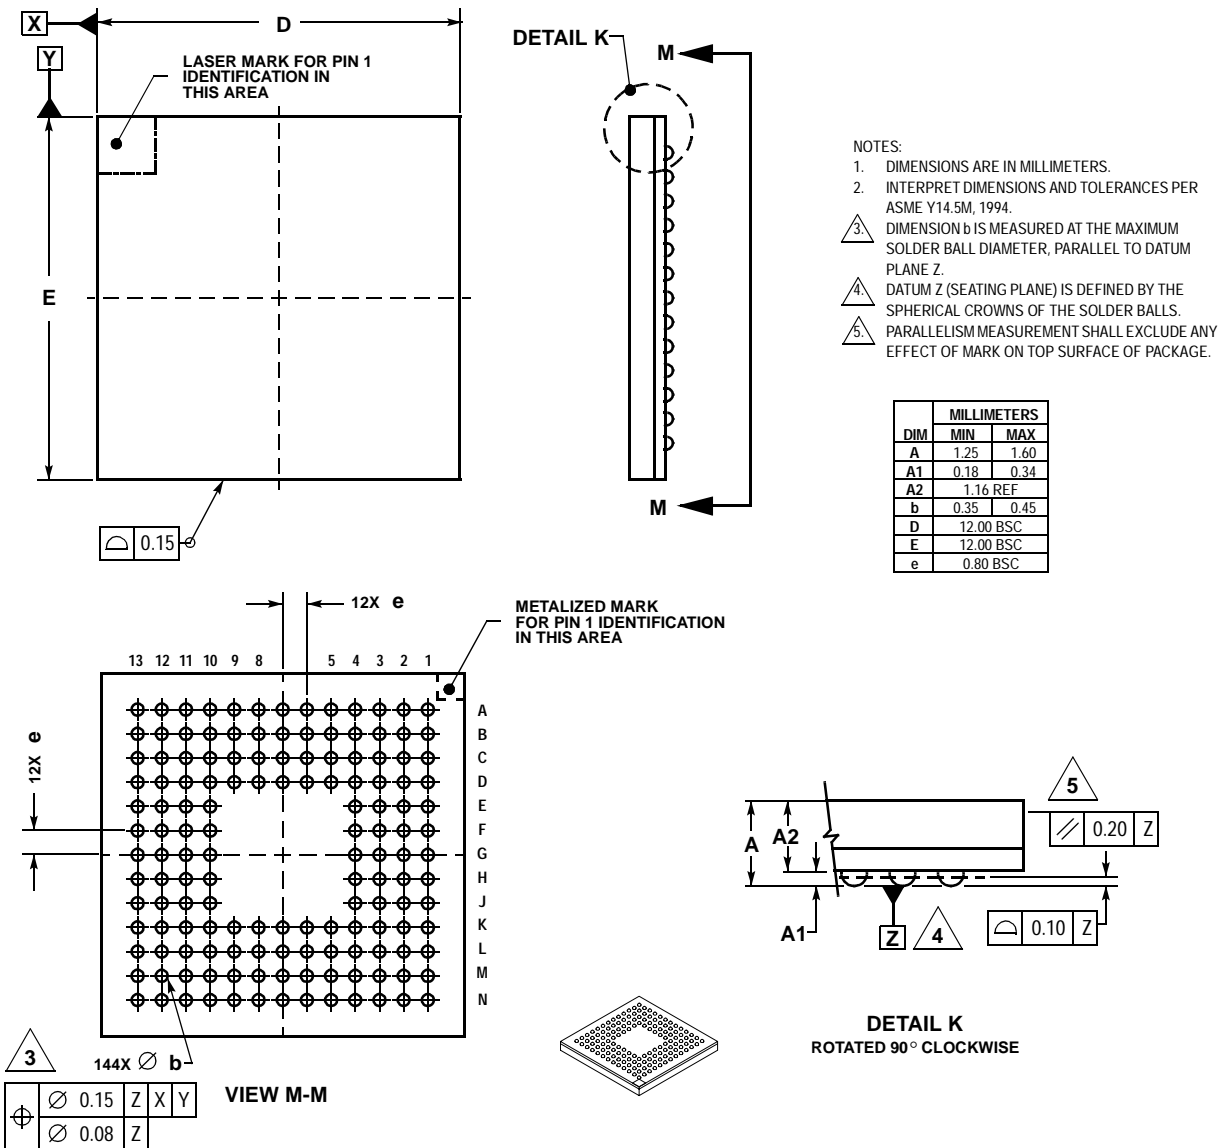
MMC2080/2075 BGA Mechanical Drawings
